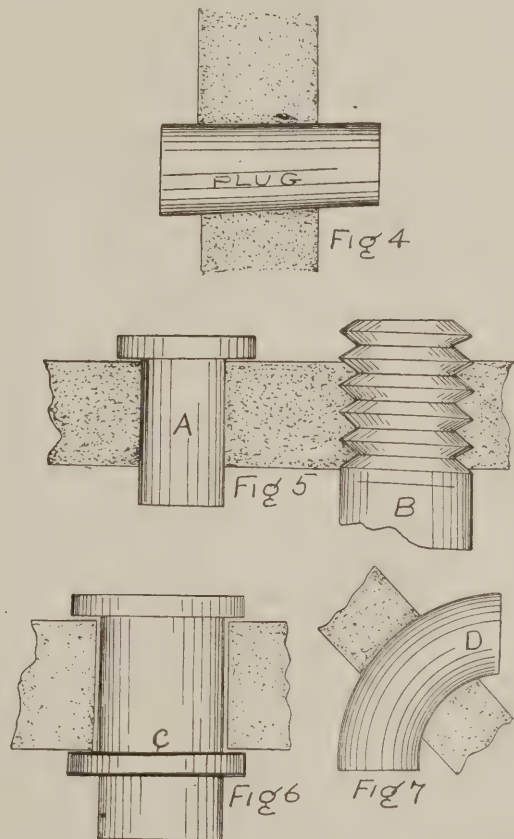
Shaping of a Hole with Tapering Plug.
